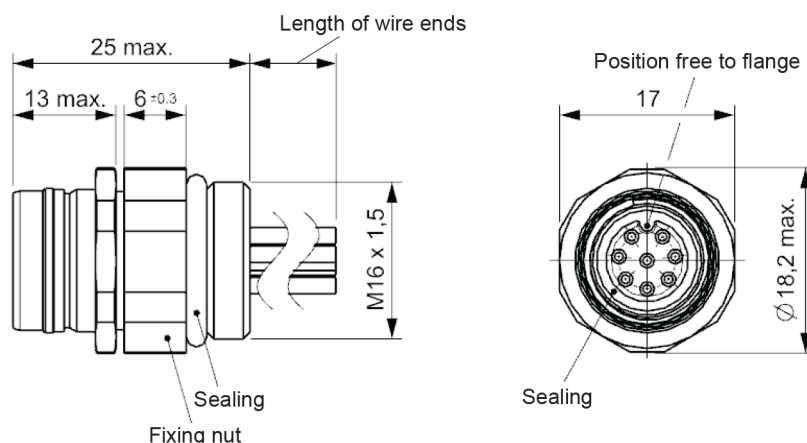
Fixed connector, female contacts, with M12 screw locking and outer push-pull locking, with wire ends, single hole front mounting thread M16 × 1,5 and mounting orientation
